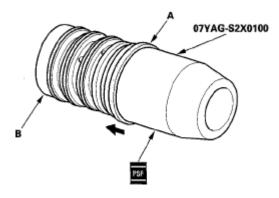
Applying Power Steering Fluid To Surface Of Sleeve Seal Ring Guide Courtesy of AMERICAN HONDA MOTOR CO., INC.
